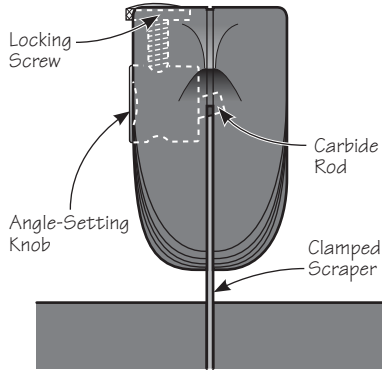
Clamp scraper in vise, set knob to desired hook angle, and run burnisher over scraper.
